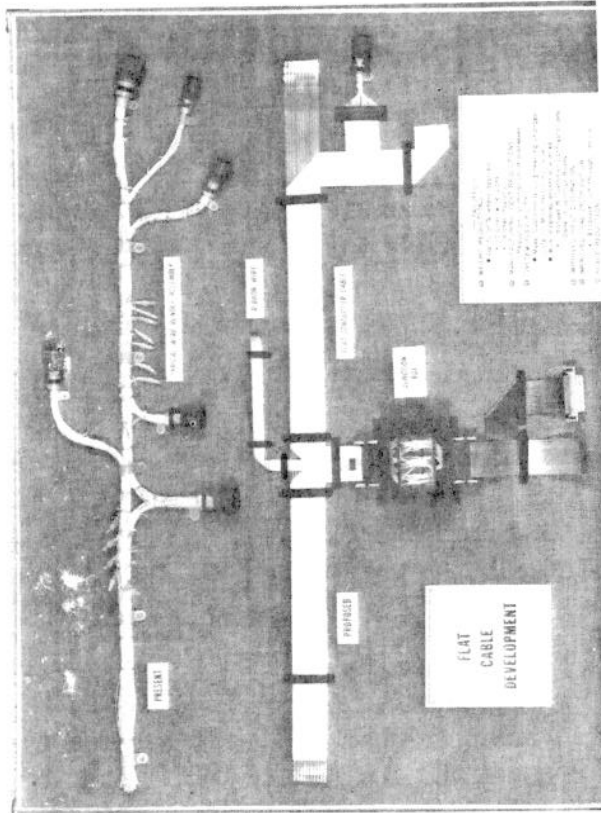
FLAT CABLE ASSEMBLY COMPARED TO ROUND WIRE BUNDLE
